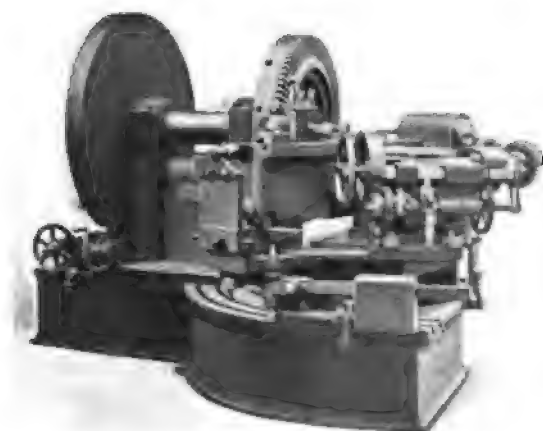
BEVEL GEAR PLANER. (Gleason Works.)
